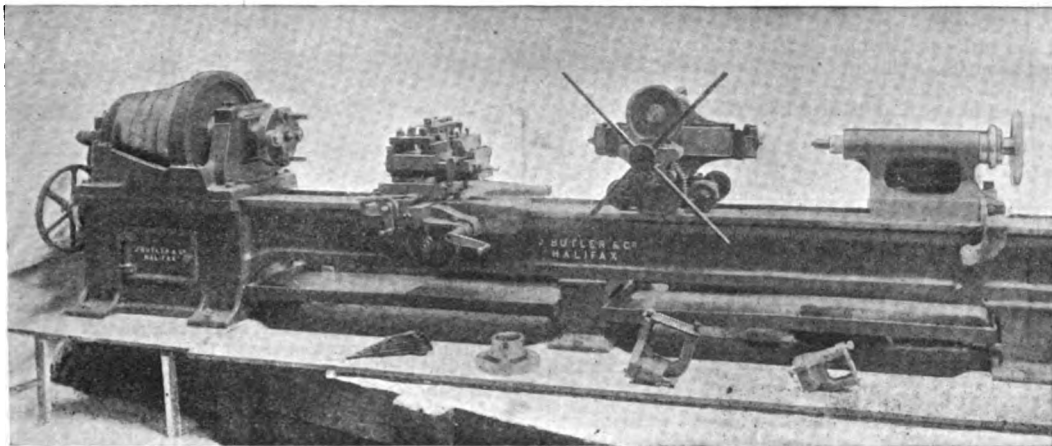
HIGH-SPEED SHAFTING LATHE.
